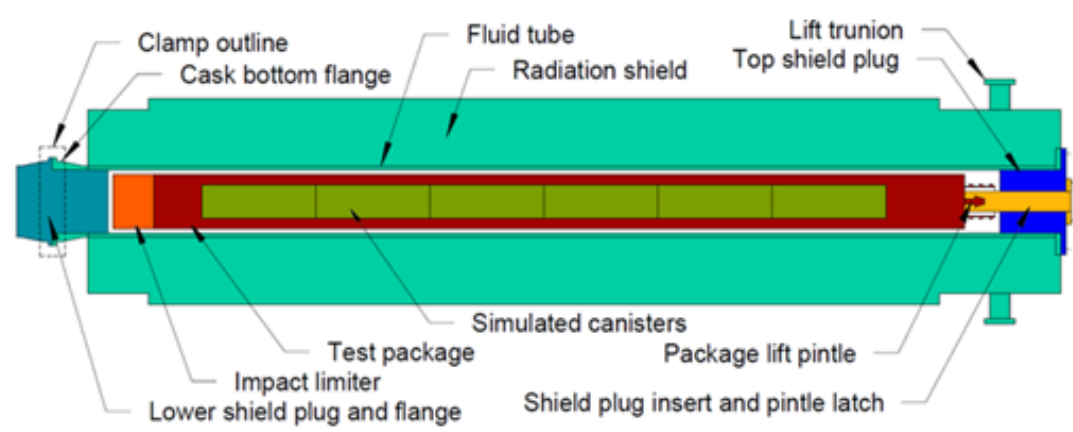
Transfer cask cross-section, showing a waste package loaded with small canisters that could contain Cs/Sr capsules.
